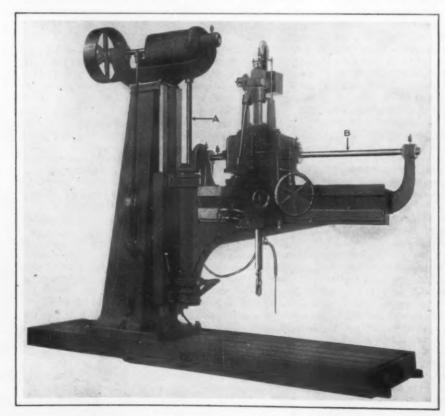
The New Baush 6-Ft. Geared Radial Drilling Machine
